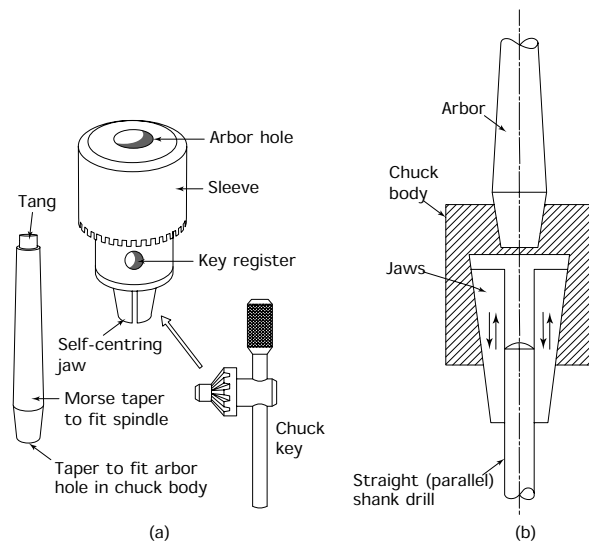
The drill chuck: (a) typical drill chuck and accessories; (b) principle of the drill chuck – this drawing shows how a series of concentric tapers are used to maintain axial alignment between the arbor, the chuck and the drill, jaws are shown at 180° for clarity, and the mechanism for moving the jaws is omitted
